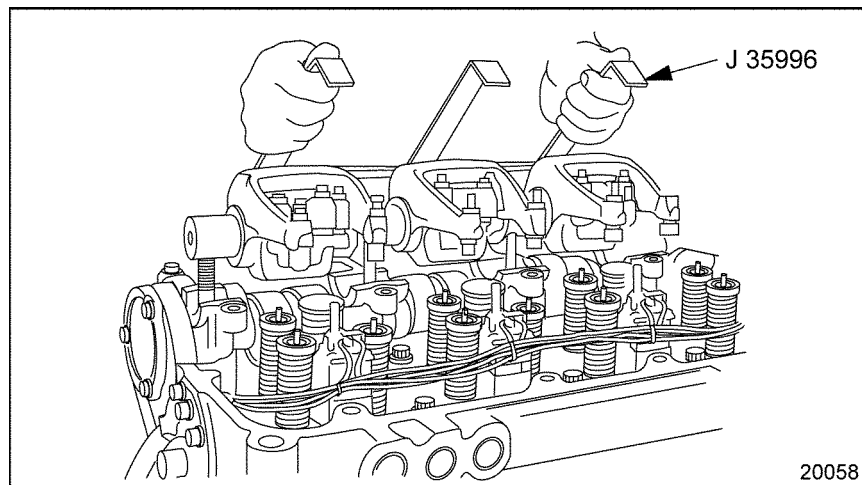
Rocker Arm/Shaft Assembly Removal/Installation
